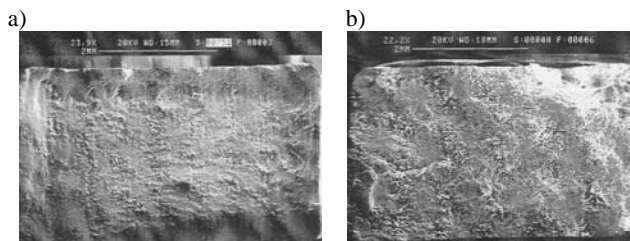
Fracture surfaces of the fatigue specimens: a) 2124 and b) AS7G composites
